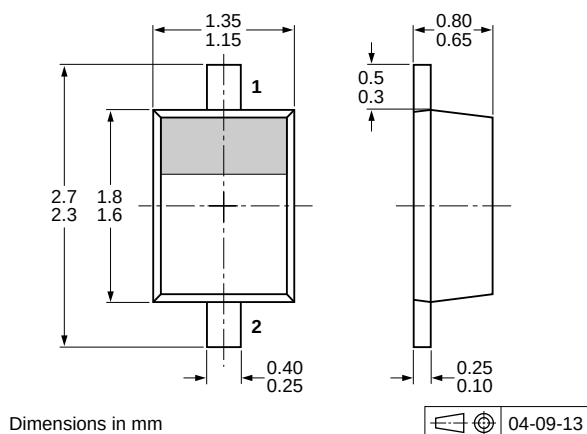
Package outline BAS16J (SOD323F/SC-90)
